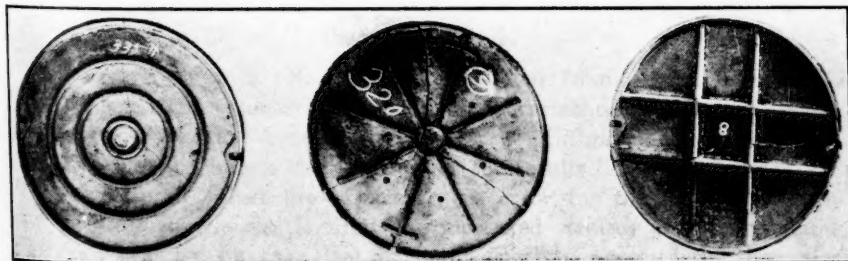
TYPICAL FRACTURES OF MANHOLE COVERS.
